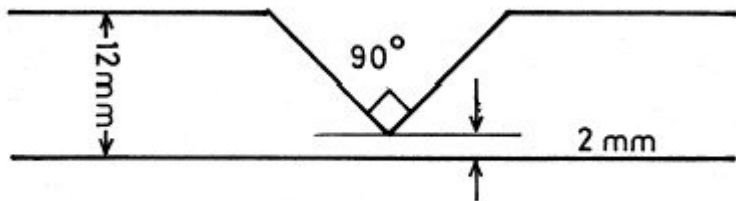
Schematic of ductile cast iron weld joint design.
